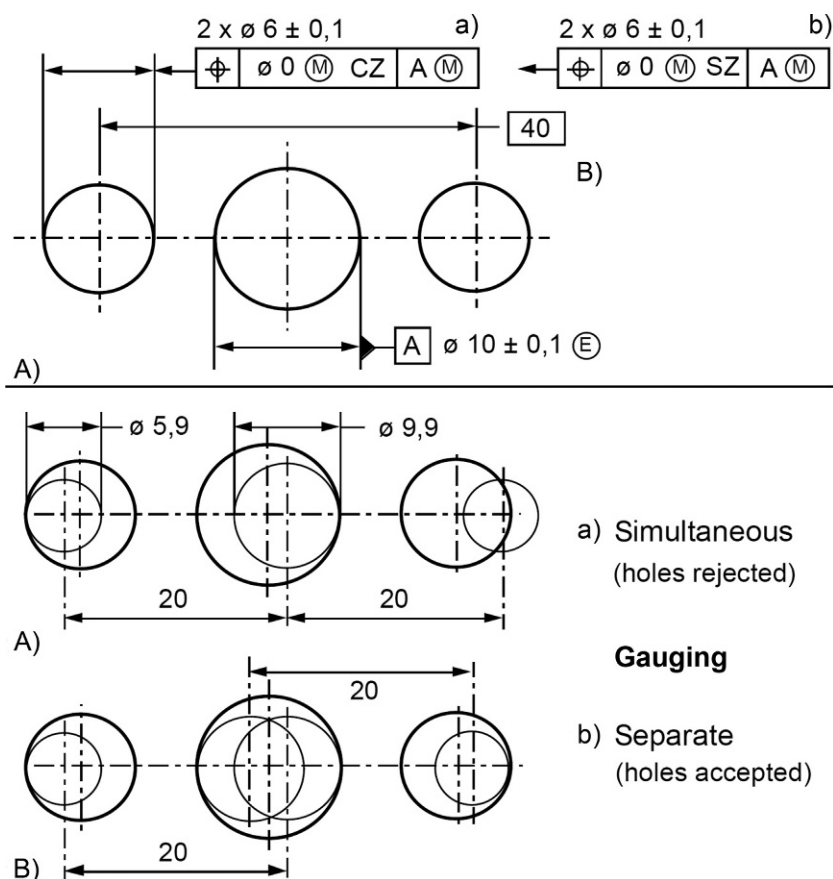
Pattern of holes related to a datum hole with \textcircled{M} , a) simultaneous gauging, b) separate gauging
